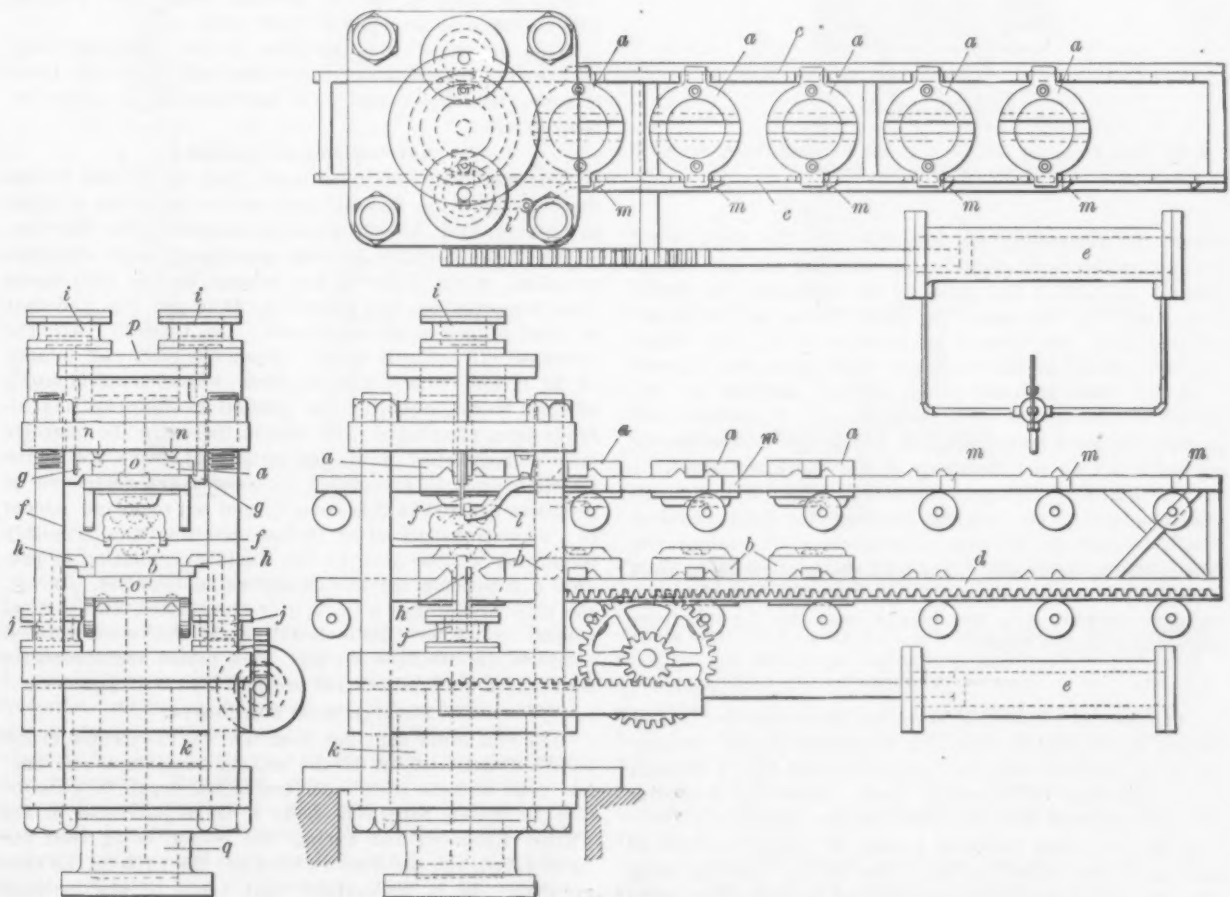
Side and End Elevation and Plan of the Baker Car Wheel Forging Press.
